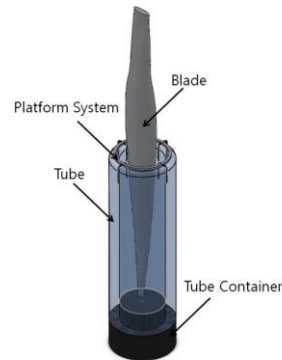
Surface Adaptive Moving Mechanism with Platform System
